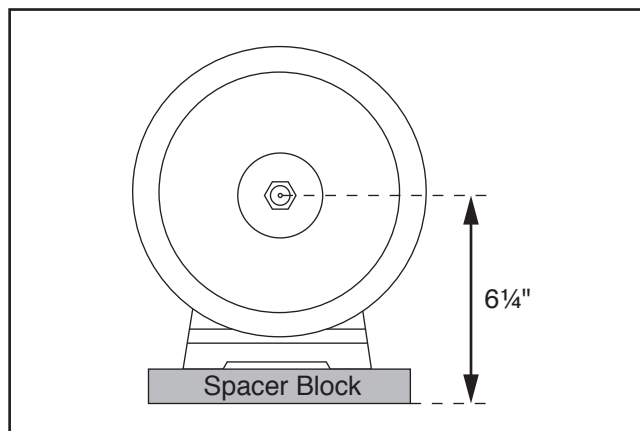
Example of distance to measure (wheel guard removed for clarity).
